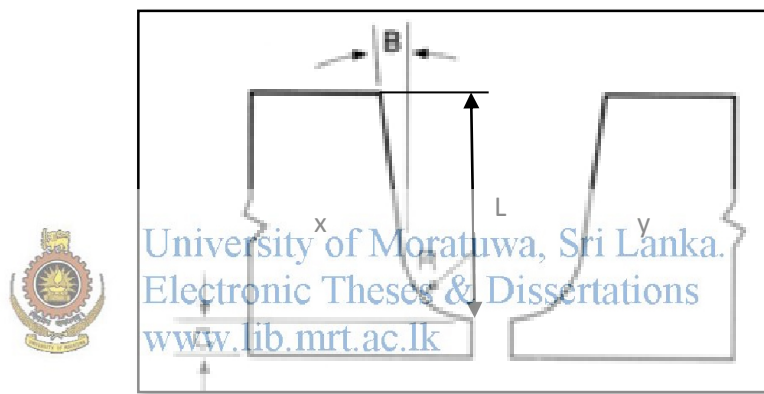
Weld design of 'U' groove [26]
